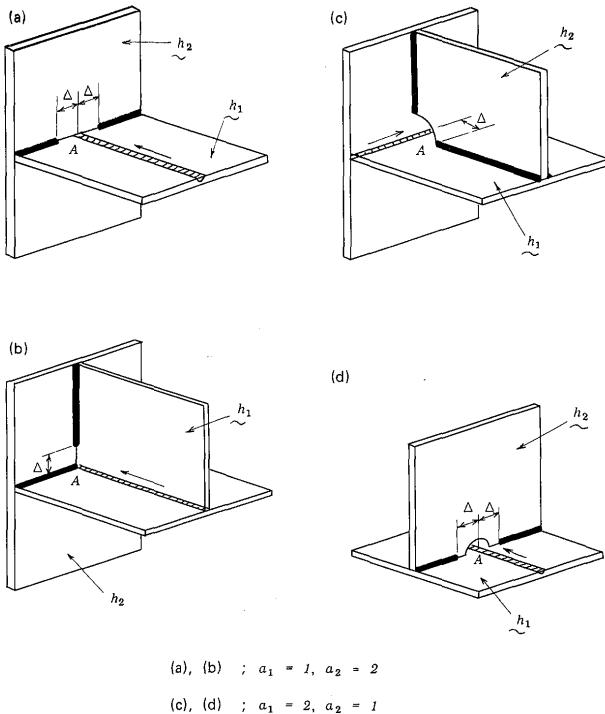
Example of weld joint restrained by shearing force through fillet welds.
